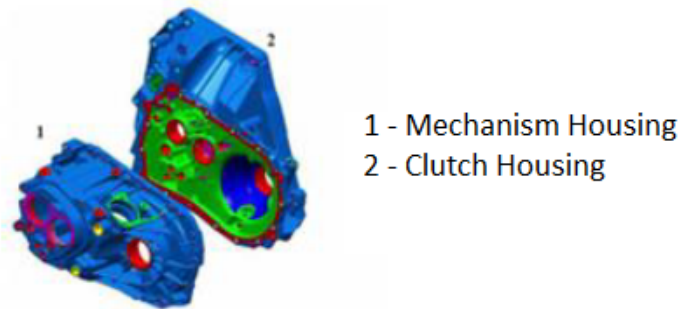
CAD of the two gearbox housings, adapted from [2]
